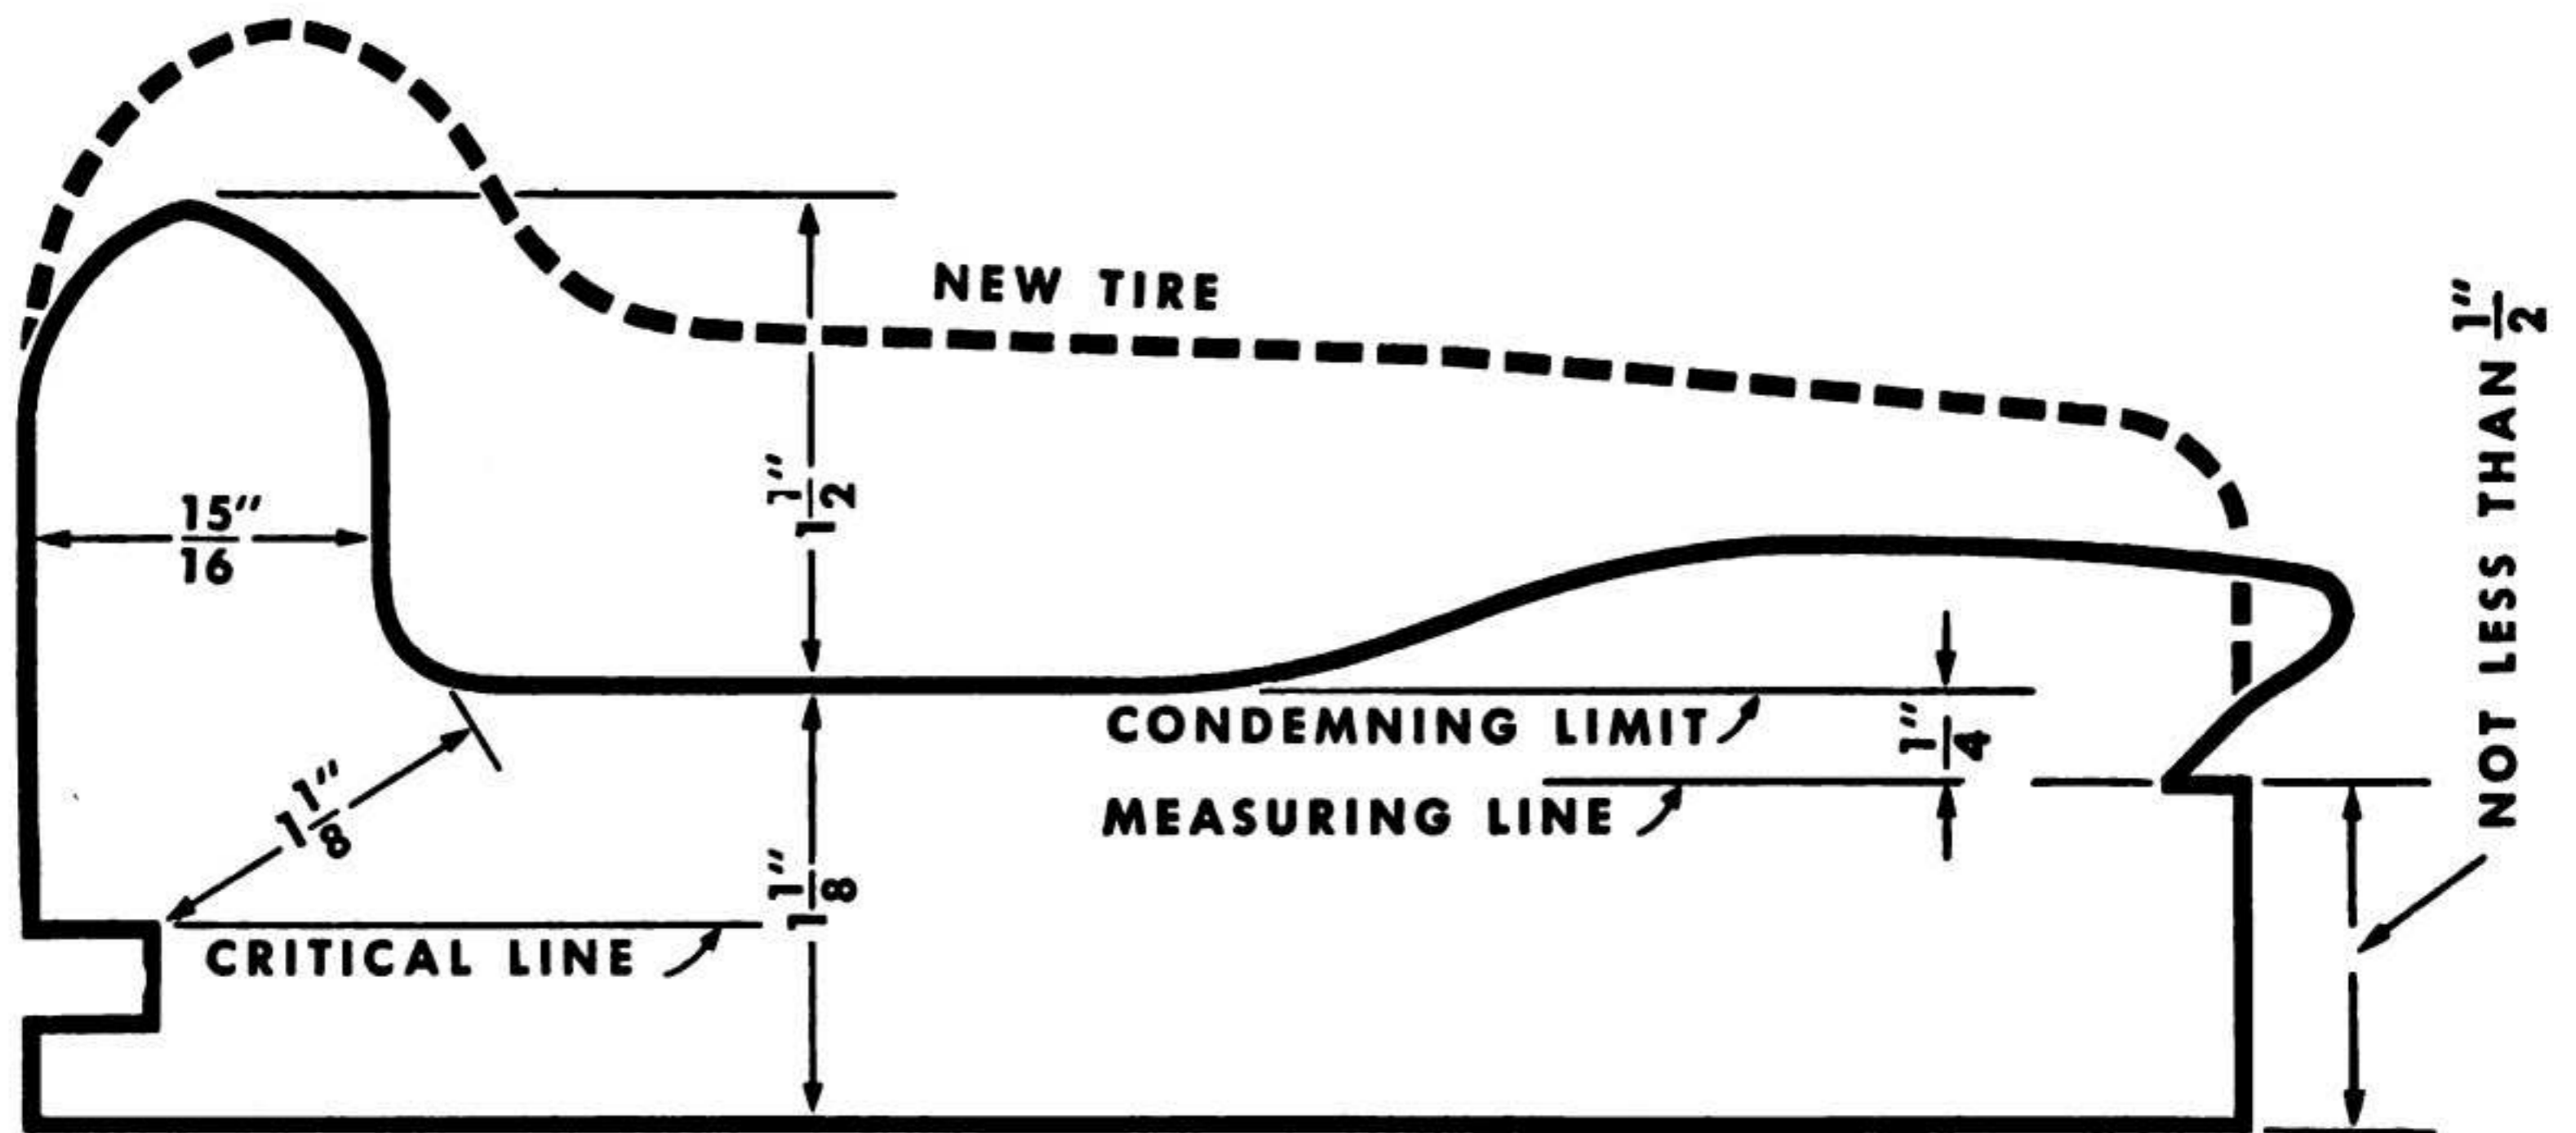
Steel tire retaining ring fastening. Minimum thickness for steel tires. Engine and tender truck wheels. (See Rule No. 80.)
